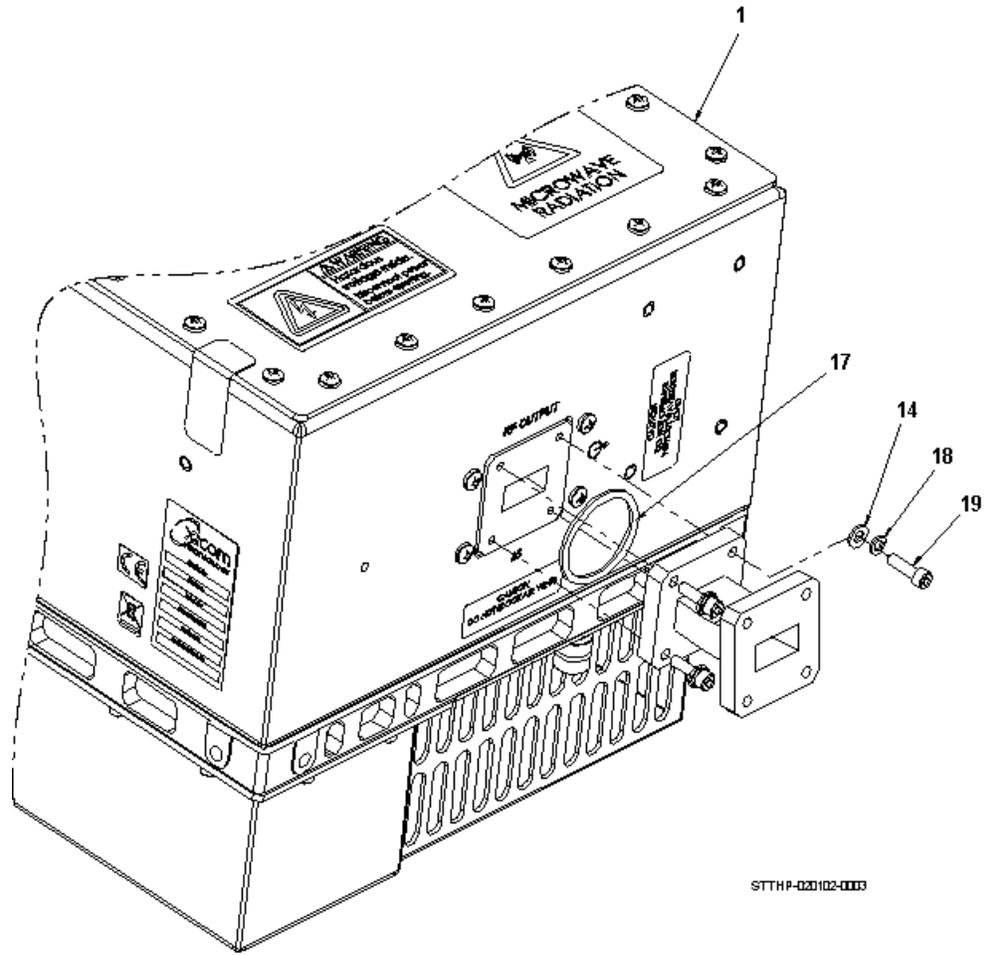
Feed Assembly, KU Band - Group 020102 (Sheet 3 of 6).
